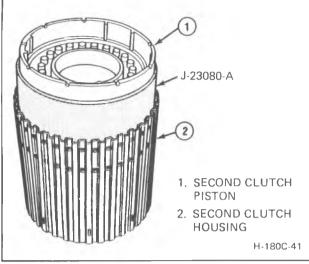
Installing Second Clutch Piston Into Second Clutch Drum
